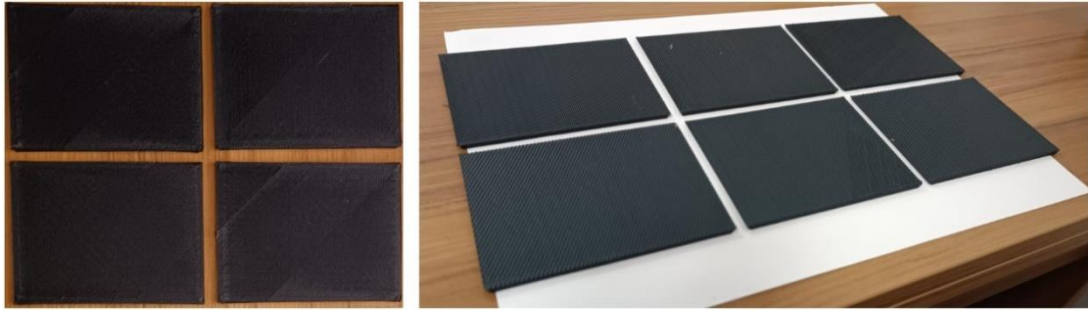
Initially printed pre-testing sample plates (left), The image of selected plates (right)
